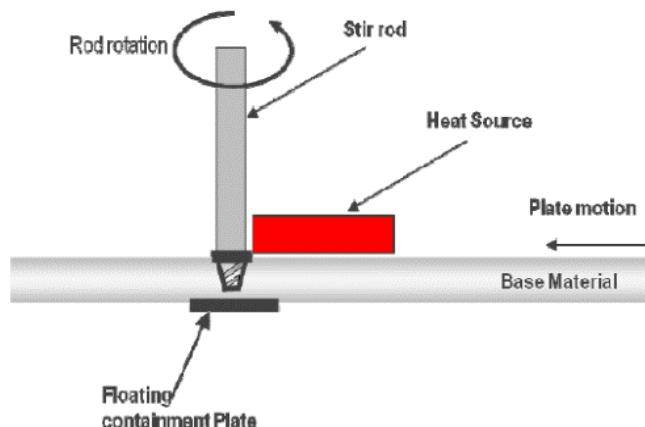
TSW terminology showing the tool during a weld
